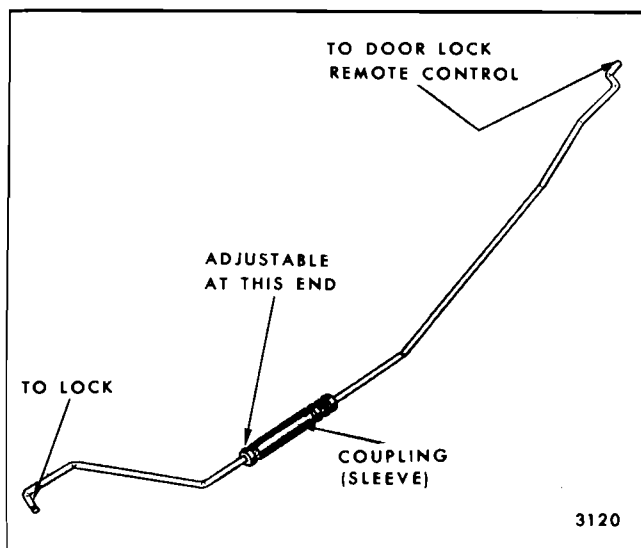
Door Lock Remote Control to Lock Connecting Rod - "G" Styles
